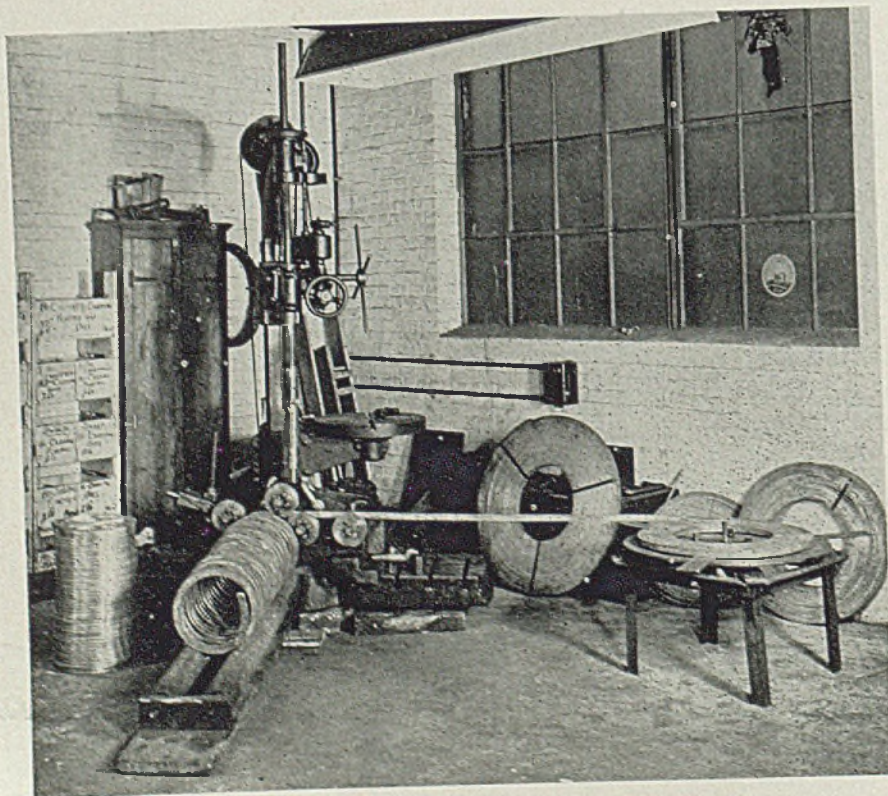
Ajax engineers designed this special machine for winding transformer coils on edge from copper strip
